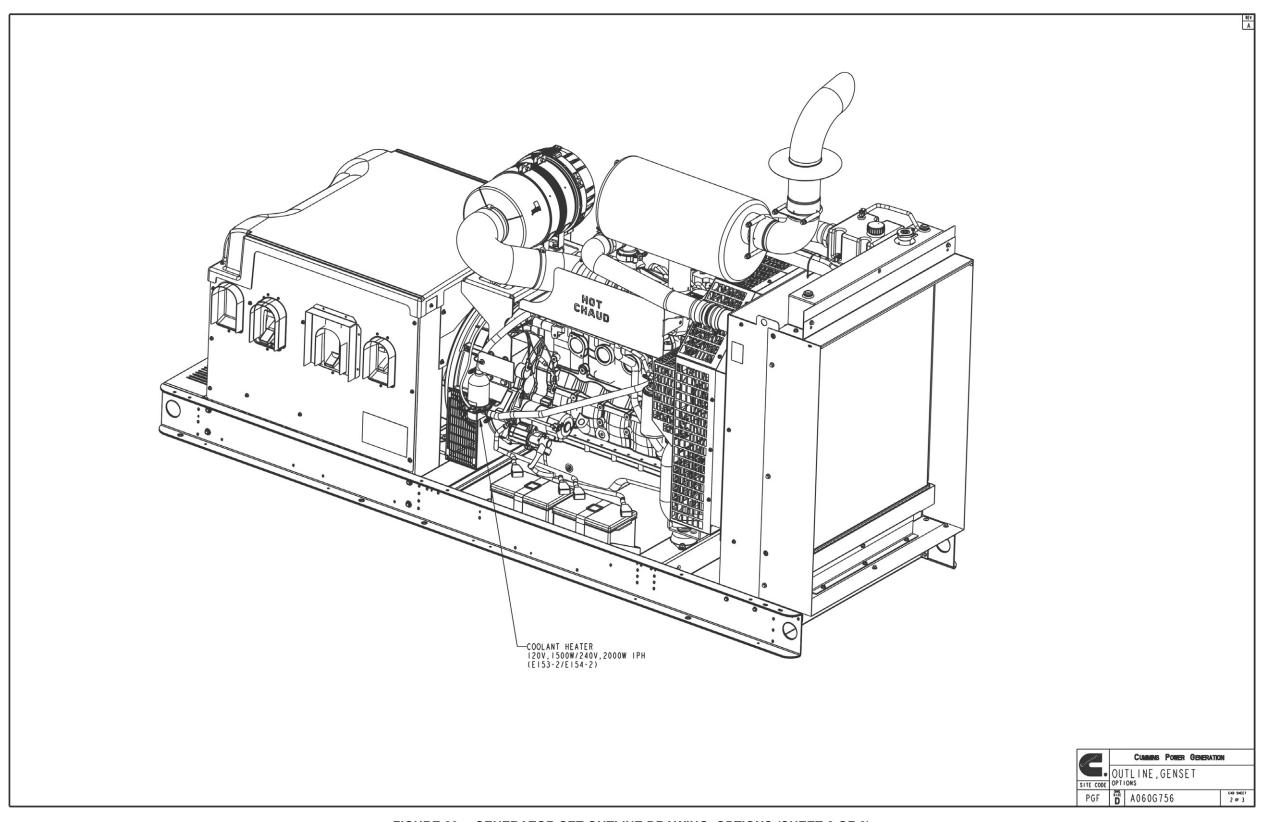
GENERATOR SET OUTLINE DRAWING, OPTIONS (SHEET 2 OF 3)
